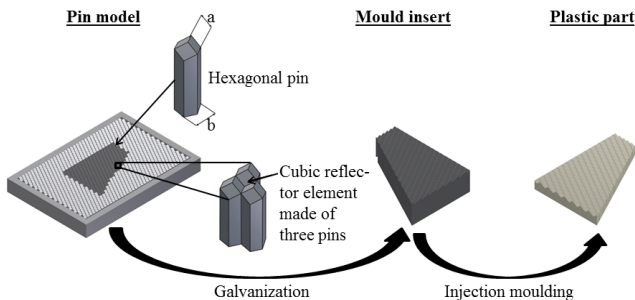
Process chain technology and hexagonal pin geometry (NiCo mould material)
